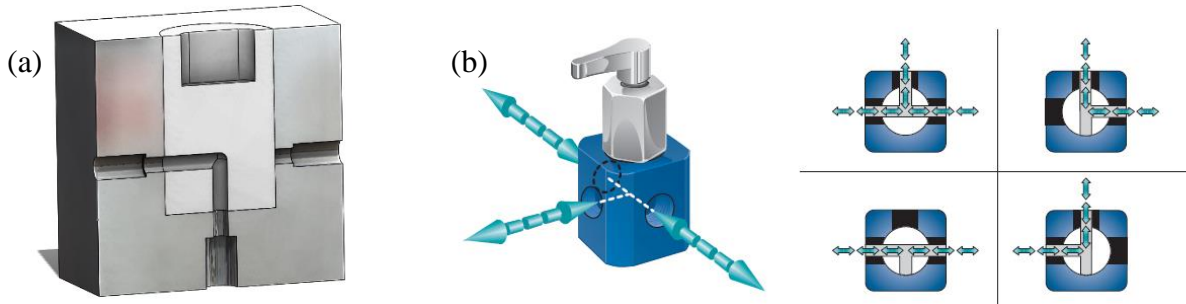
First attempts to find a commercially available product that would function as a manifold device (a) CAD design drawn in Solidworks of a cross sectional view of a rotary valve manifold. The center piece (in lighter grey) will rotate to open to the inlet channel desired to flow to the outlet at a given time. *Image credit:* Clark Teeple for CAD drawing. (b) Commercially obtained flow valve from Hamilton (Reno, NV) that is sufficiently similar to the conceptual design in (a).
